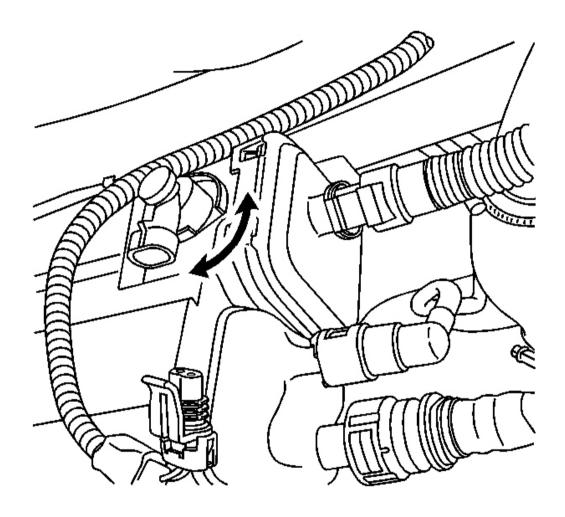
Releasing Locking Position Of (EVAP) Canister Vent Valve Courtesy of GENERAL MOTORS CORP.
